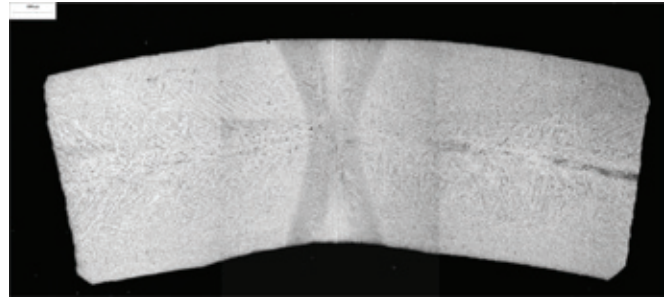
HF-Welding: Ø 139.7 X 9.7 –S355
